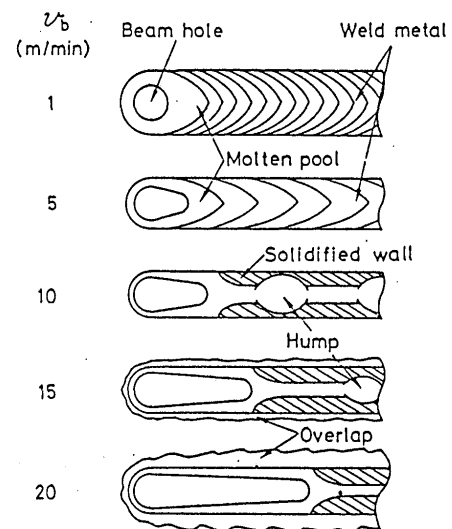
Schematic diagram of high speed photograph in single electron beam welding at various welding speed.
